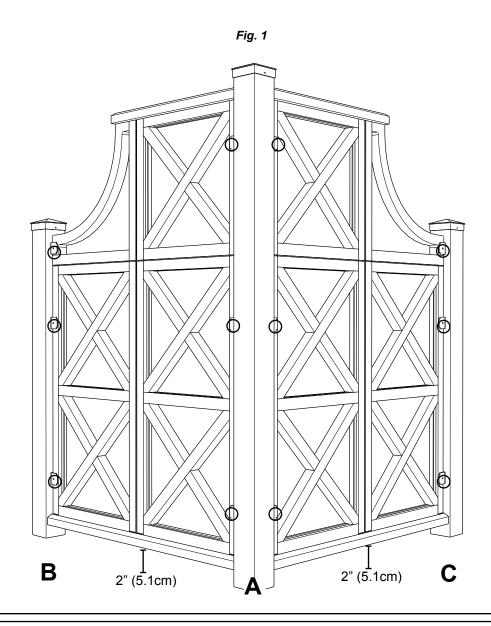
Predrill Holes and Fasten with S5- 1" Pan Head Screw
